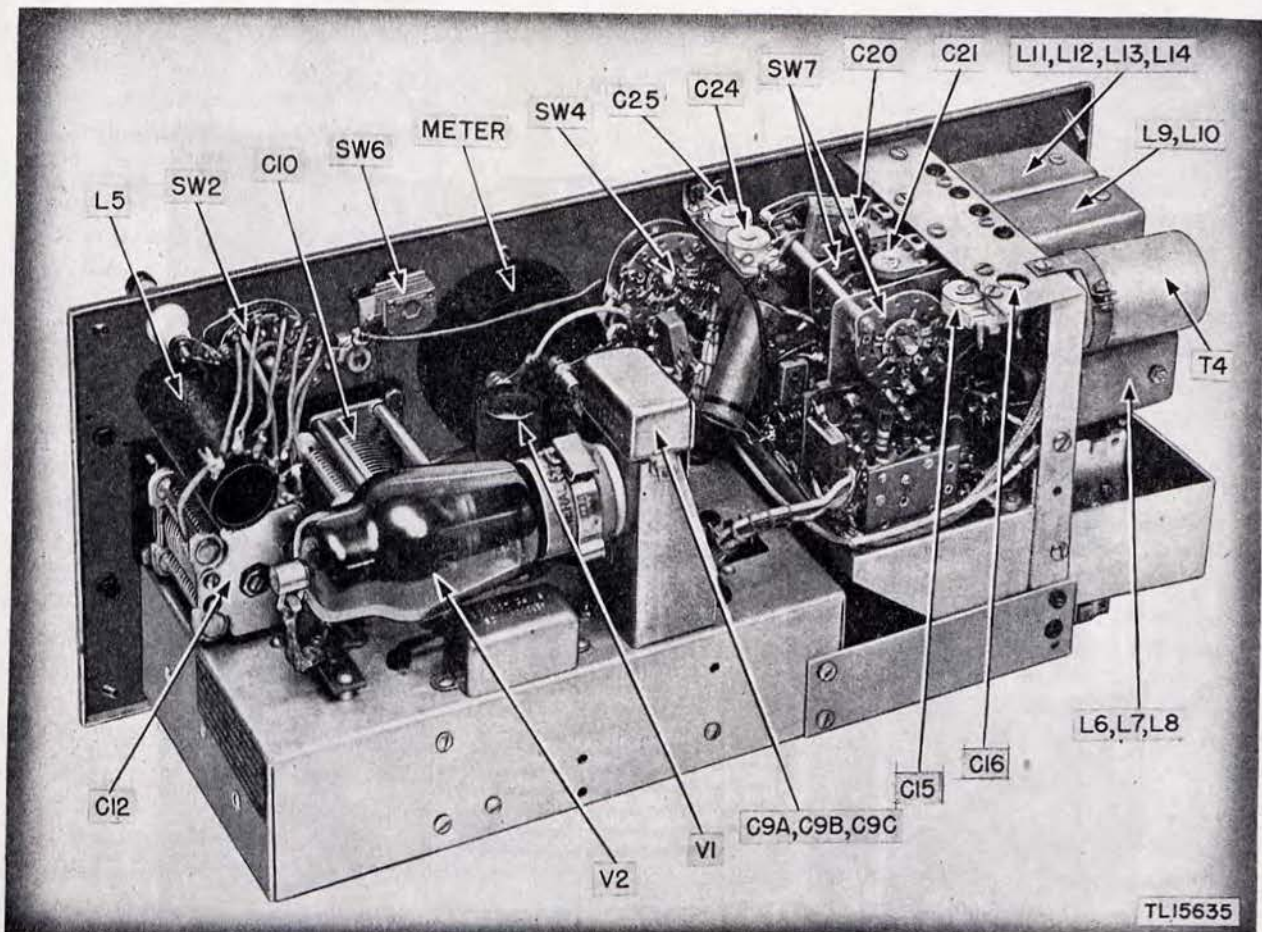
Rear view of receiver-transmitter chassis, showing location of parts.
